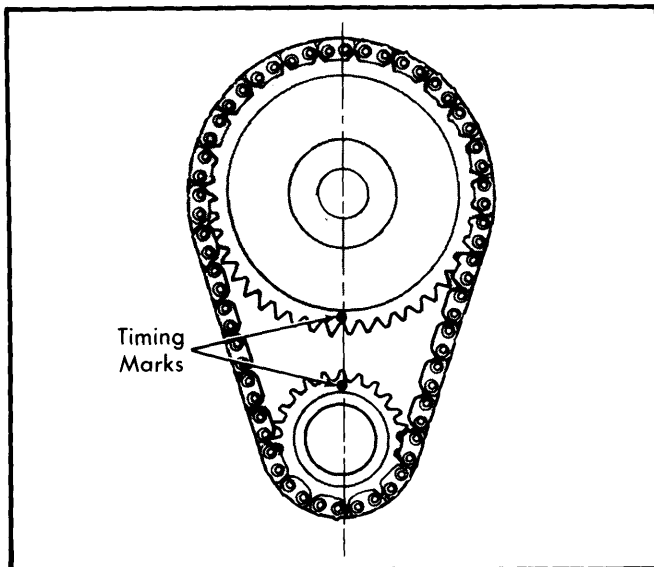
Timing Chain and Crankshaft Sprocket Alignment
